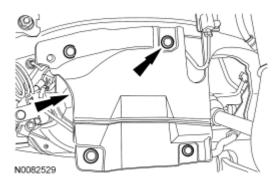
Locating LH Splash Shield And Pin-Type Retainers Courtesy of FORD MOTOR CO.
